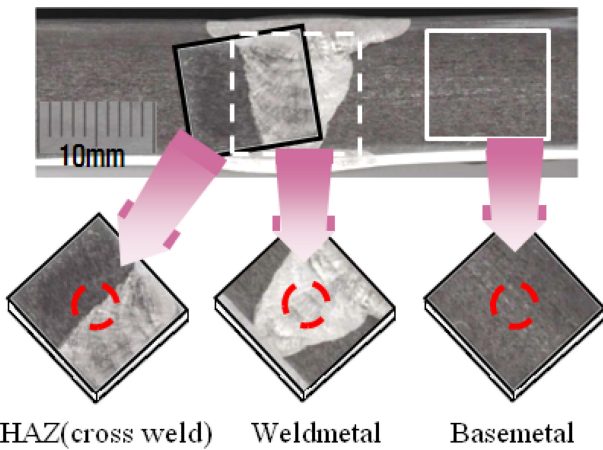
Inconel 617 alloy weldment block and SP creep specimens
